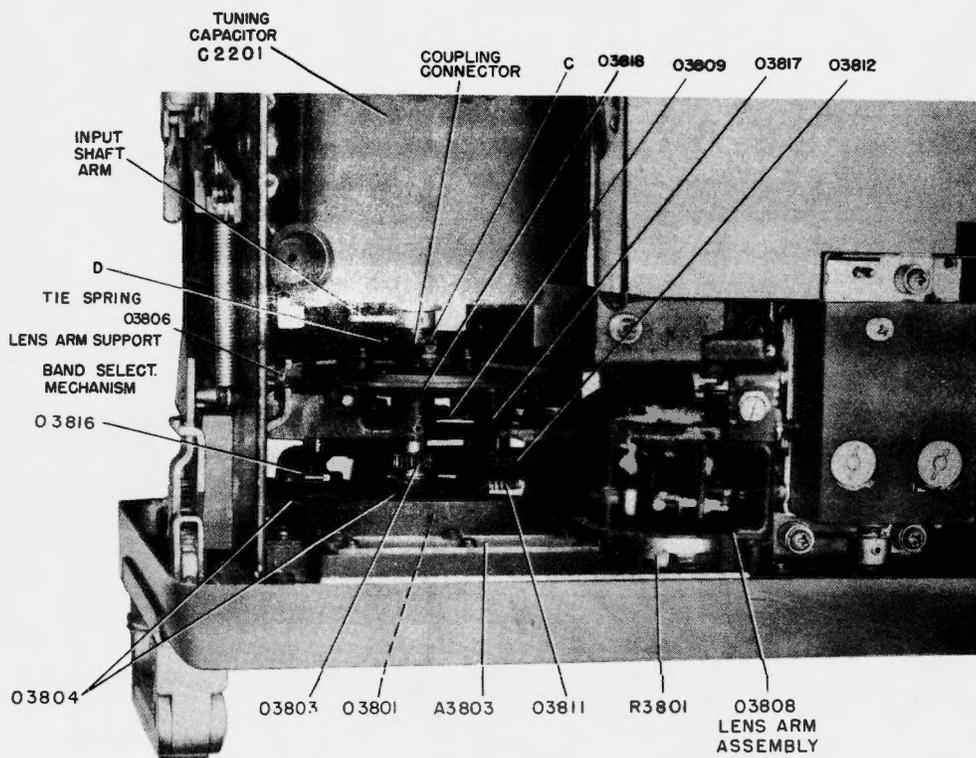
Dial Mechanism and Lens-Arm Assembly, Lifted, Top View
